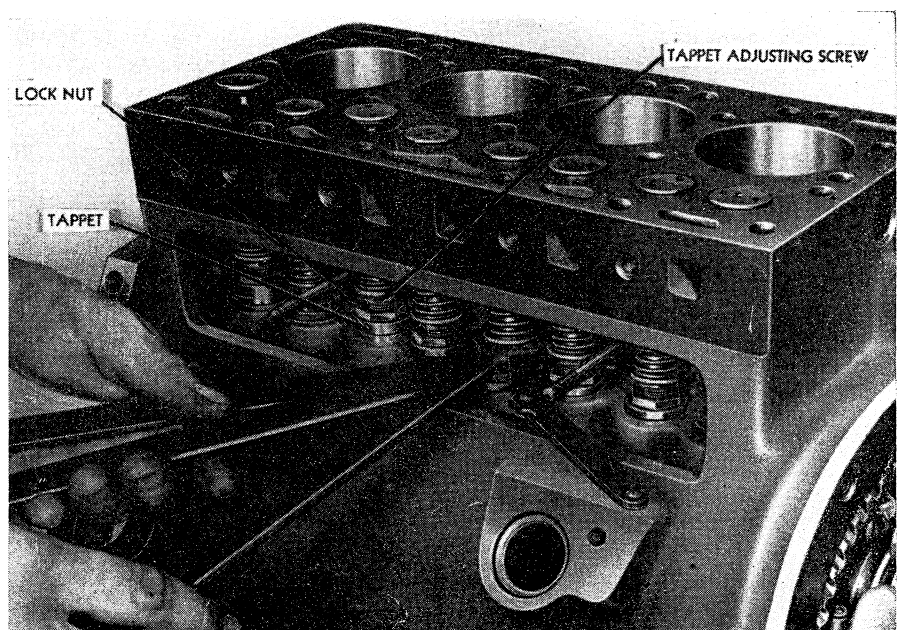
Adjusting tappets on Continental N62 engine. A three wrench operation.
